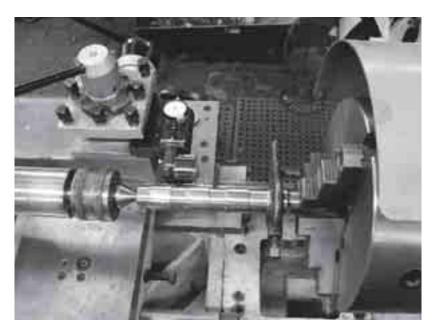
The view of working assembly (machine tool, fixture, object, tool) -burnishing
